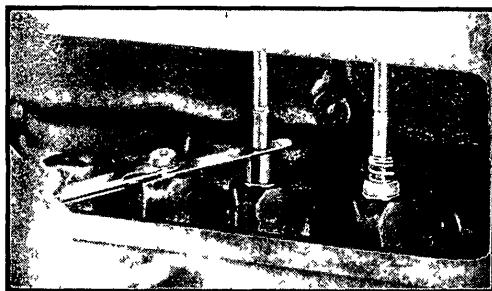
Showing use of special plug gauge for checking tappet clearance on engines with hydraulic valve lifters. 1940-52
